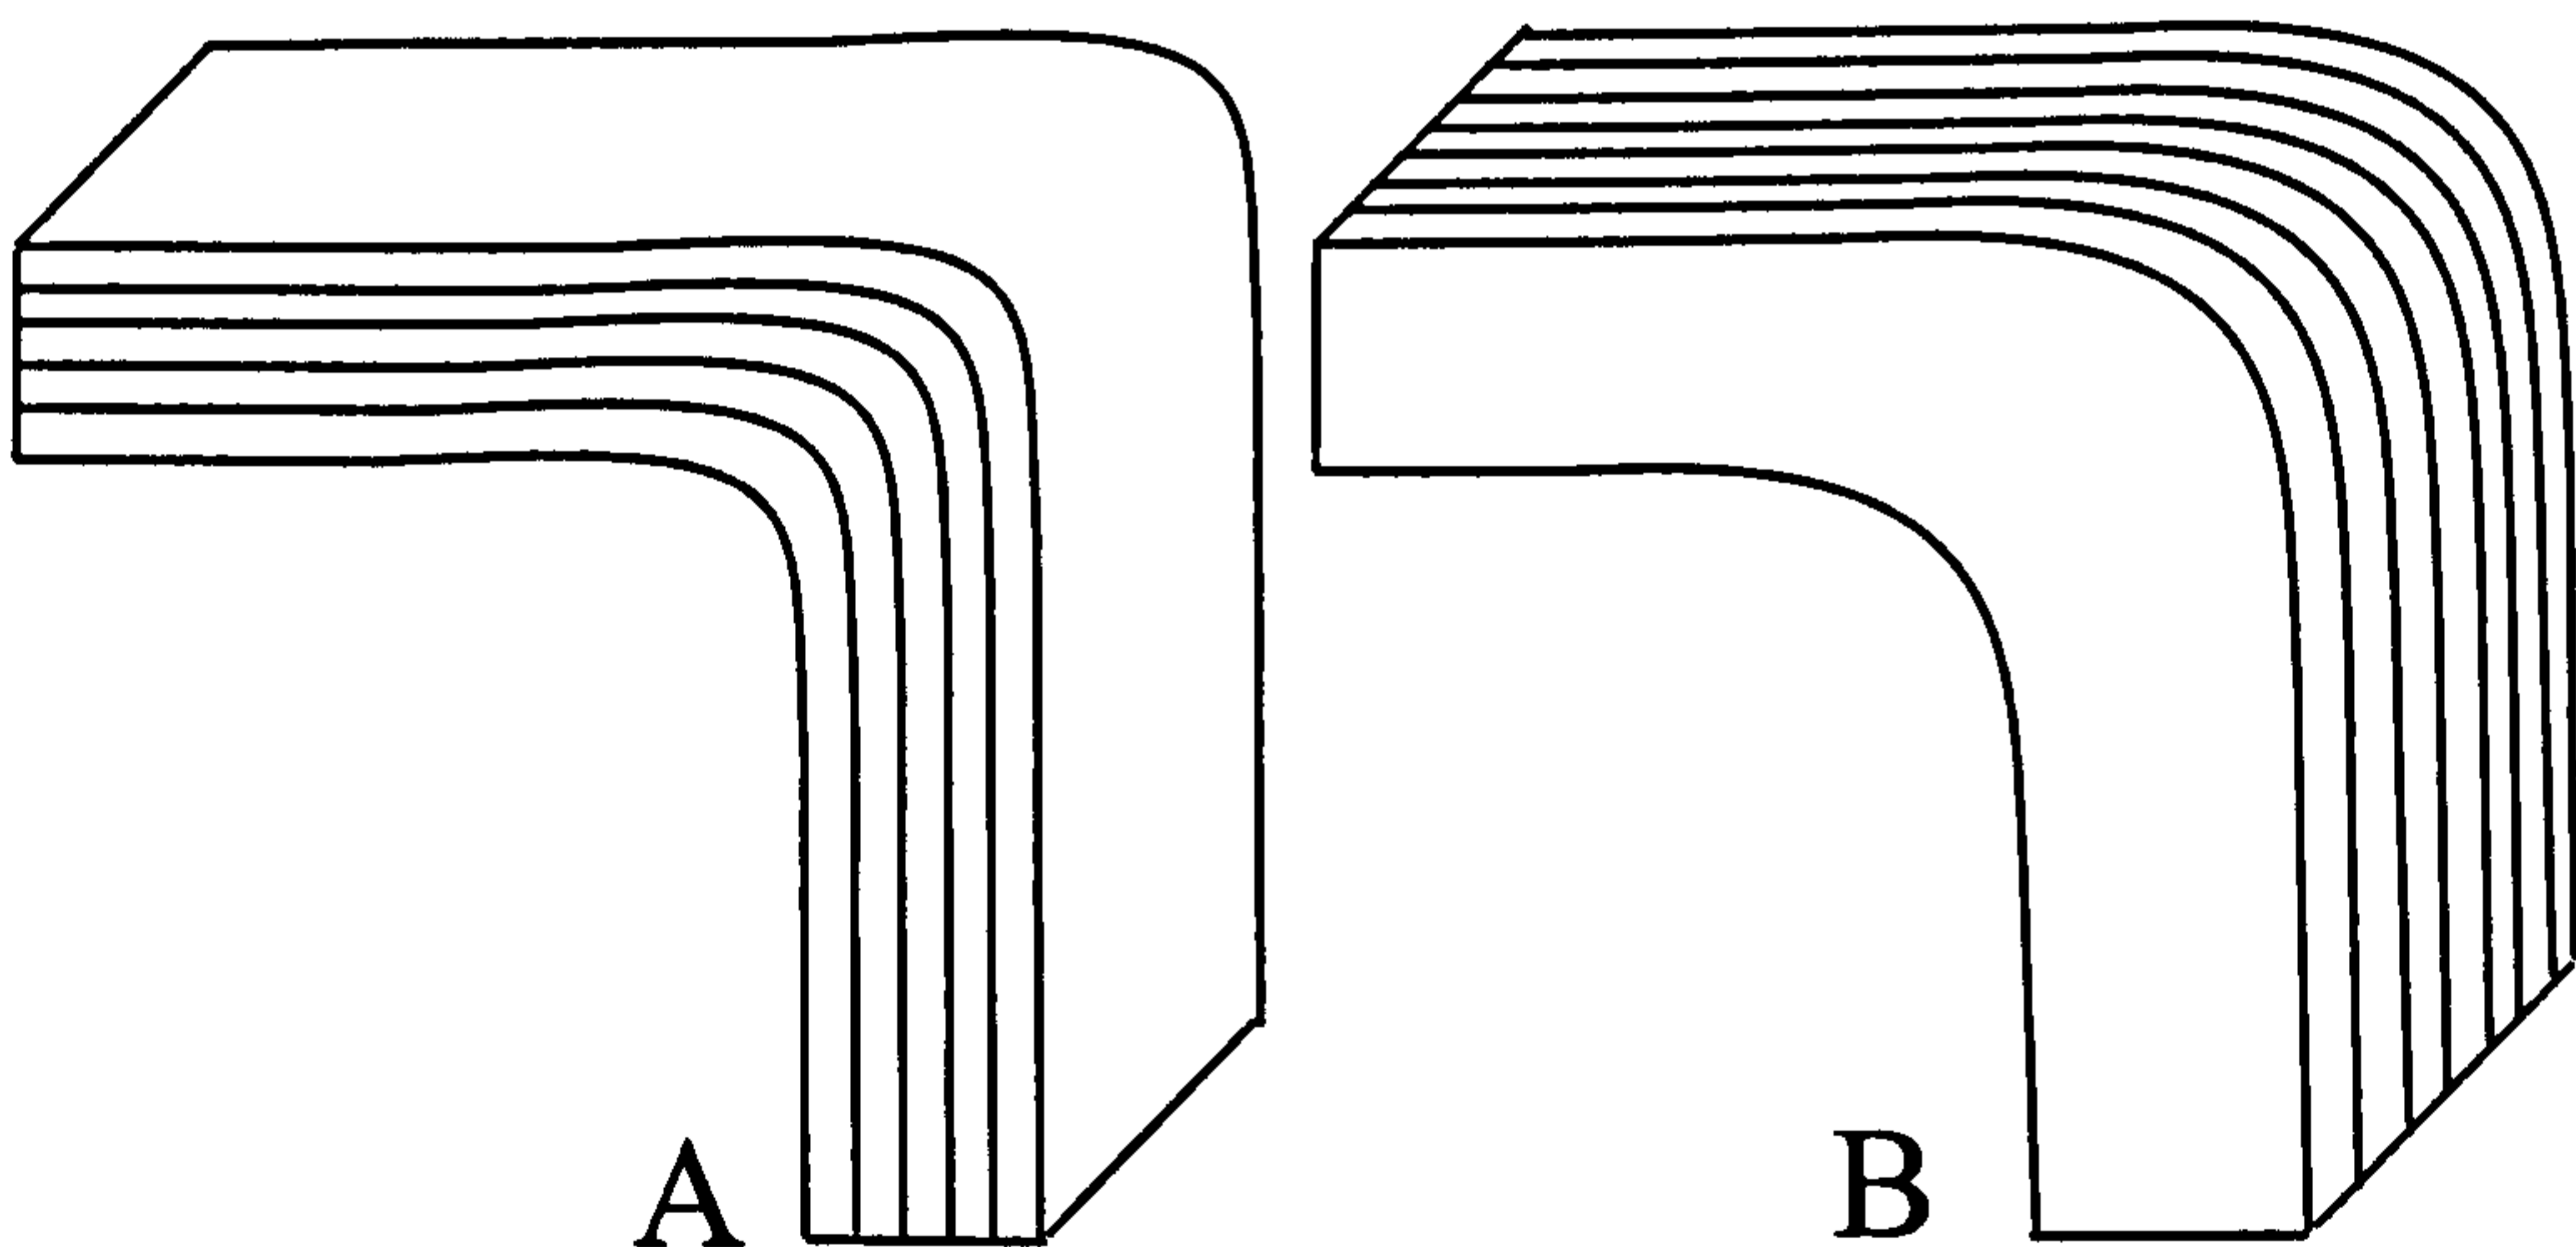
SST Core sections showing wound laminations (A) and stacked laminations (B)
